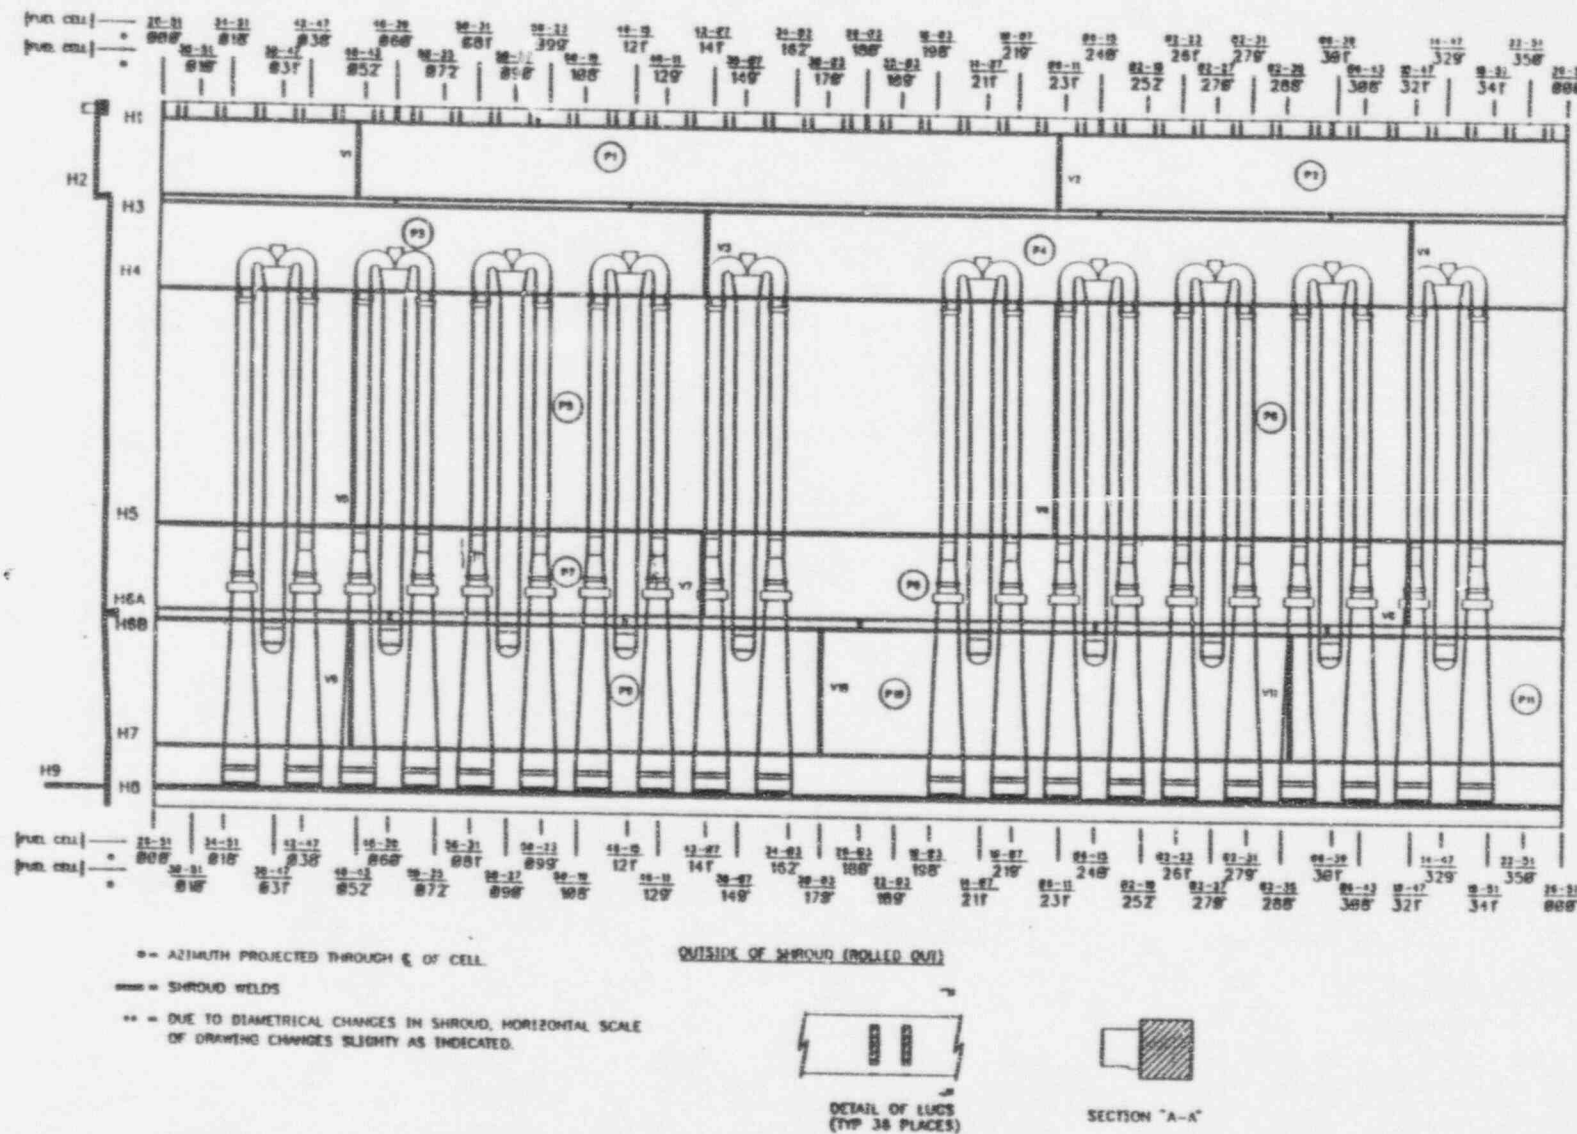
Roll-Out View of Outside Shroud Surface
